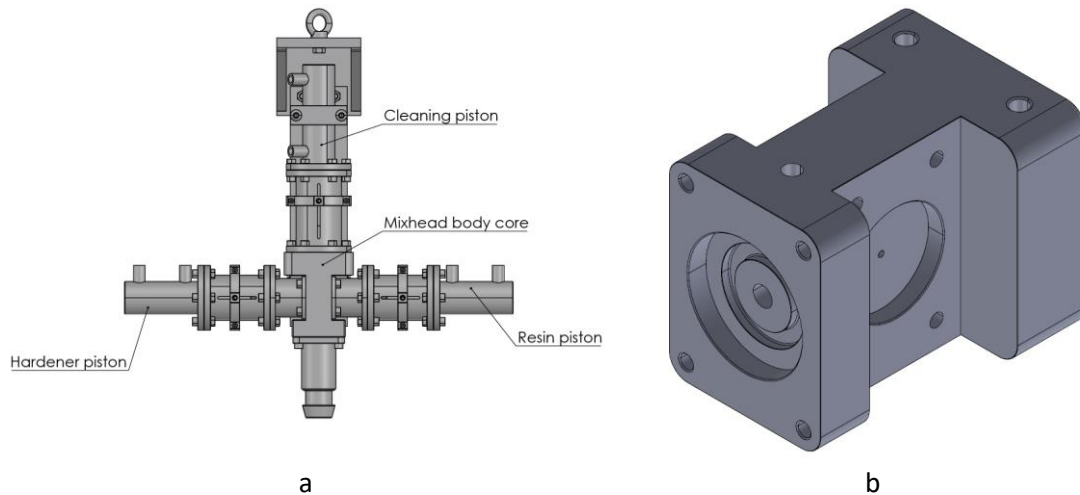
Machine mixhead. a) Detail of pistons position. b) detail of the mixhead body core
